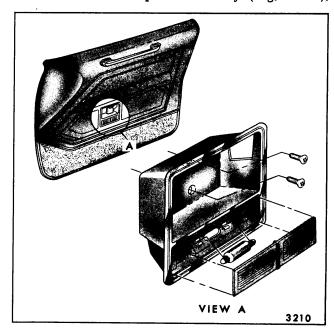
Remote Control Cup and Courtesy Lamp Assy. - Cadillac Styles
